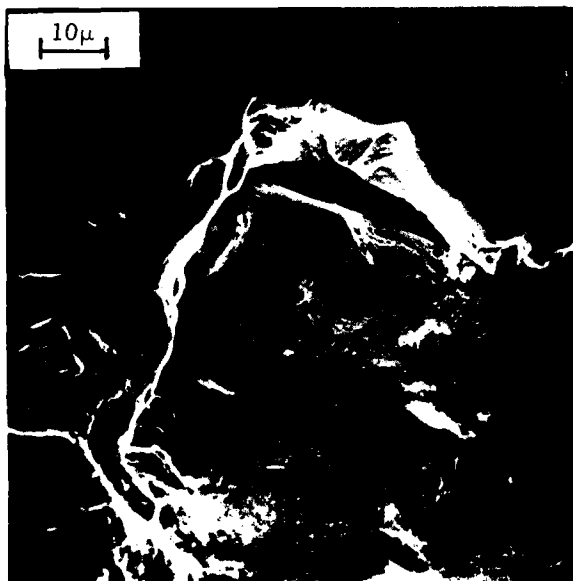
CIBLE RESULTS ON J57-#2 BEARING (S/N B1274-2) INNER RACE
